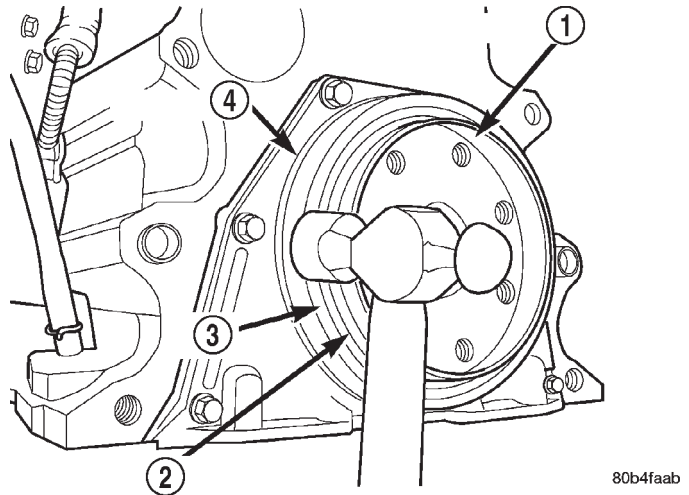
Seal Installation Using Alignment Tool and Hammer
